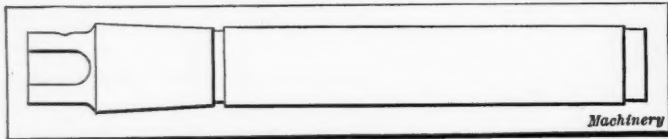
Arbor used when Grinding the Jig Bushings in Fig. 4
